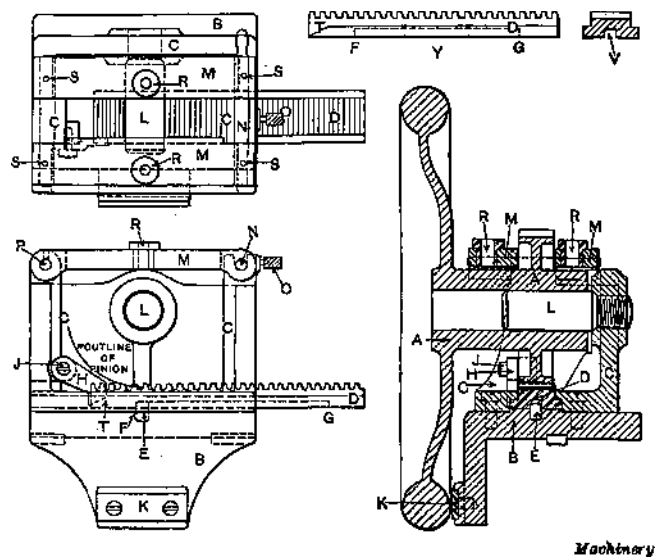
Jig for Drilling Set-screw Holes in Work shown in Fig. 1
